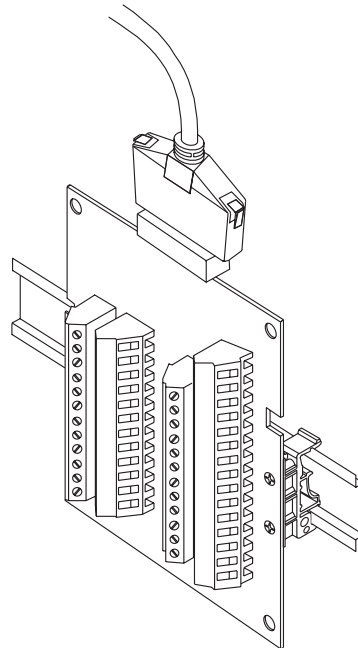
TB50 Mounted on a DIN Rail (Front)
